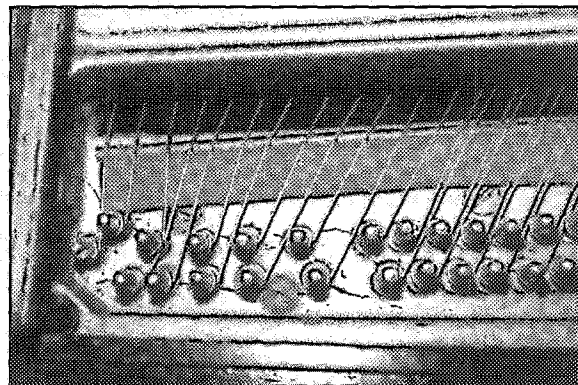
Plate cracks in the bass section. Note strings #3 and #4.
